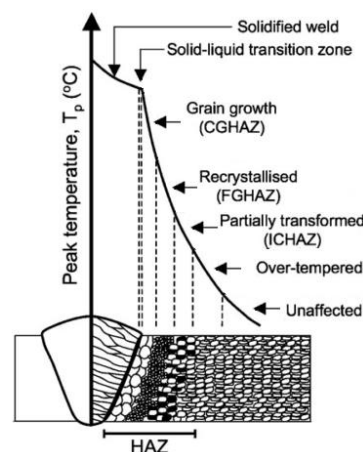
Weld metallurgical zones in a single pass weld [107] (see also [115][116])
